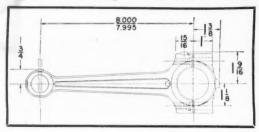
Drawing of a connecting rod for which the milling fixture shown in Fig. 2 was designed
